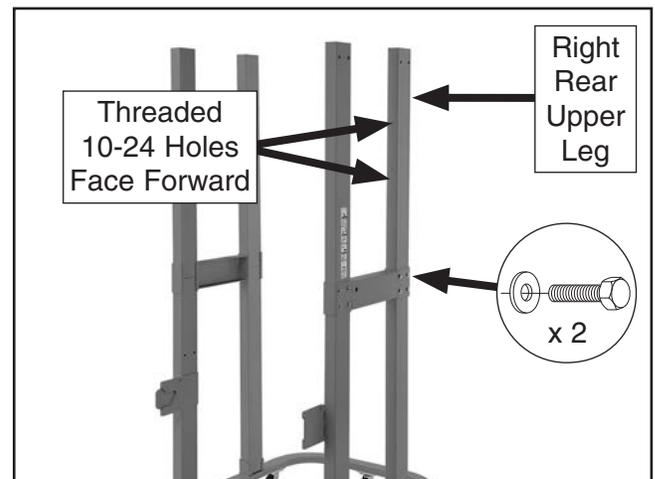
Right rear upper leg installed with 10-24 threaded holes facing forward.
